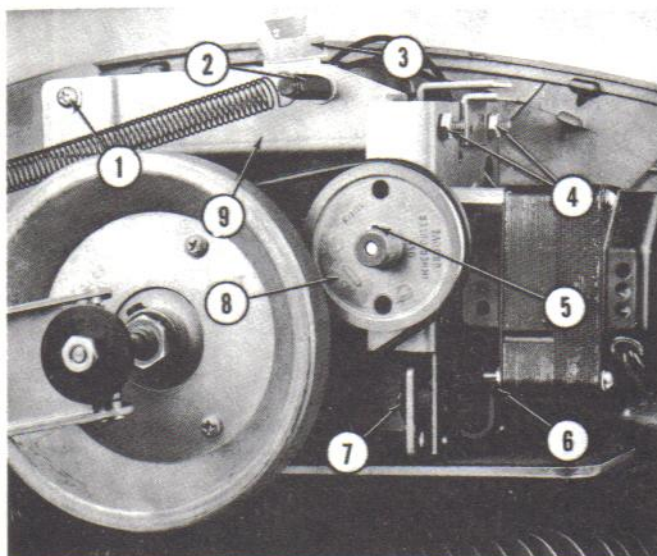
TURNTABLE BELT AND DRIVE PULLEY ADJUSTMENT
